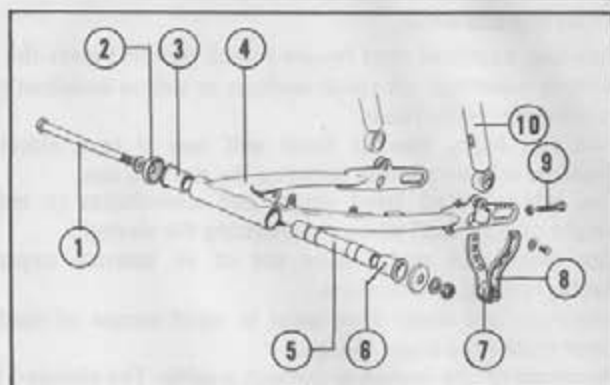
① Rear fork pivot bolt ⑦ Roller
